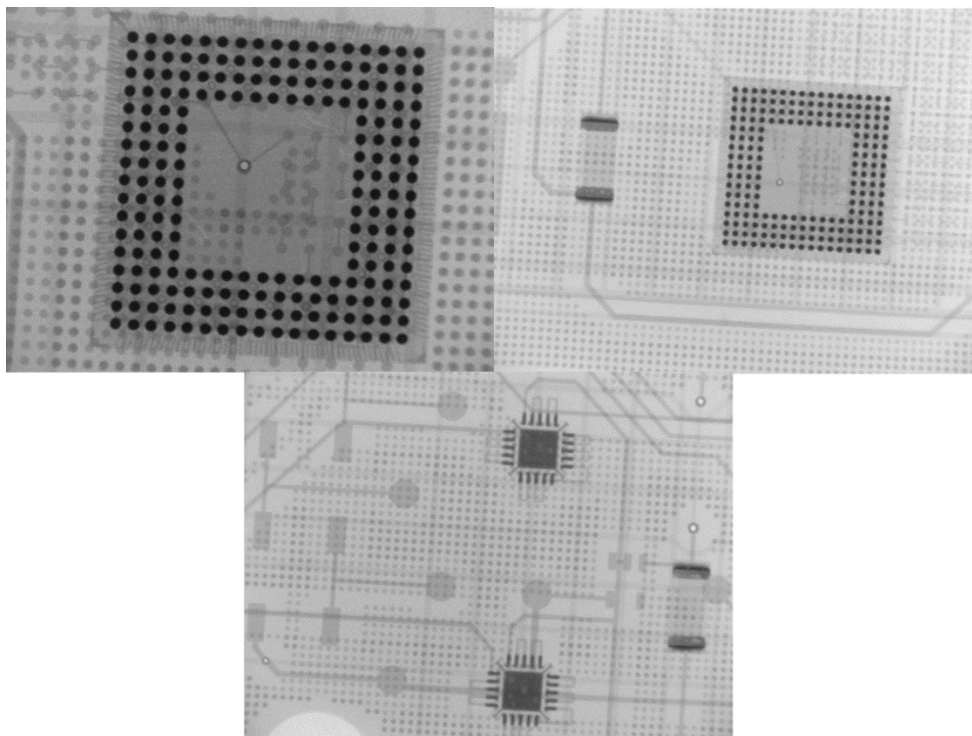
Representative X-ray inspection images for SAC305
